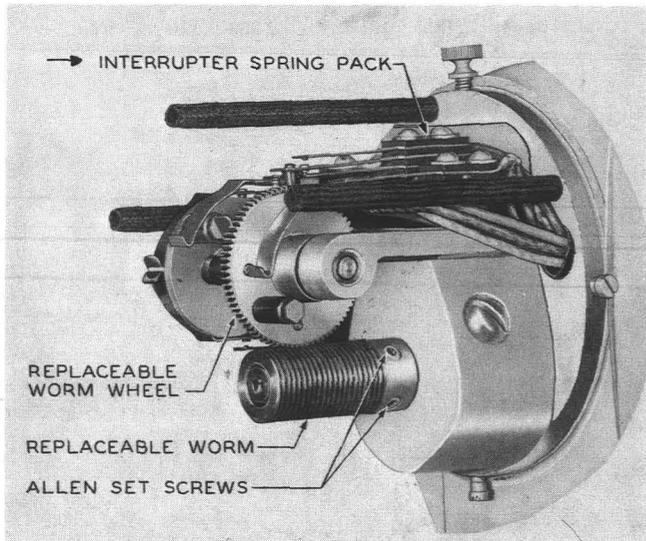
Outer Separable Bearing Plate Details (Holtzer-Cabot Machines)
